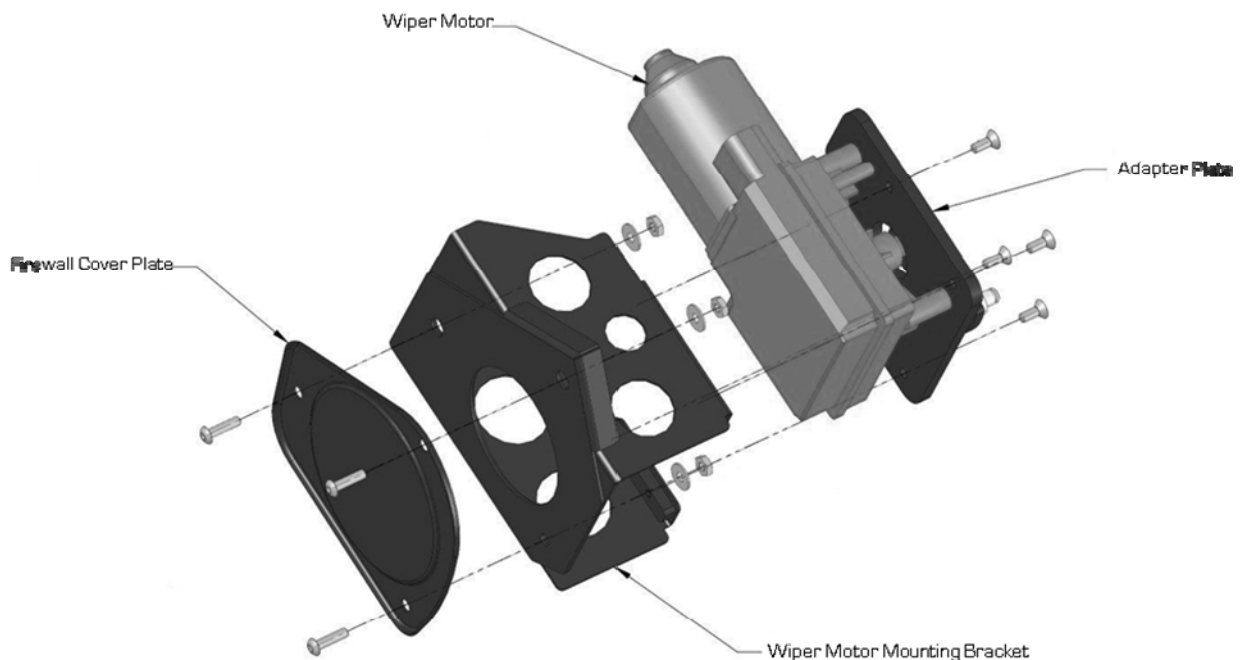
Cover Plate, Mounting bracket, Wiper Motor, and Adapter Plate assembly
